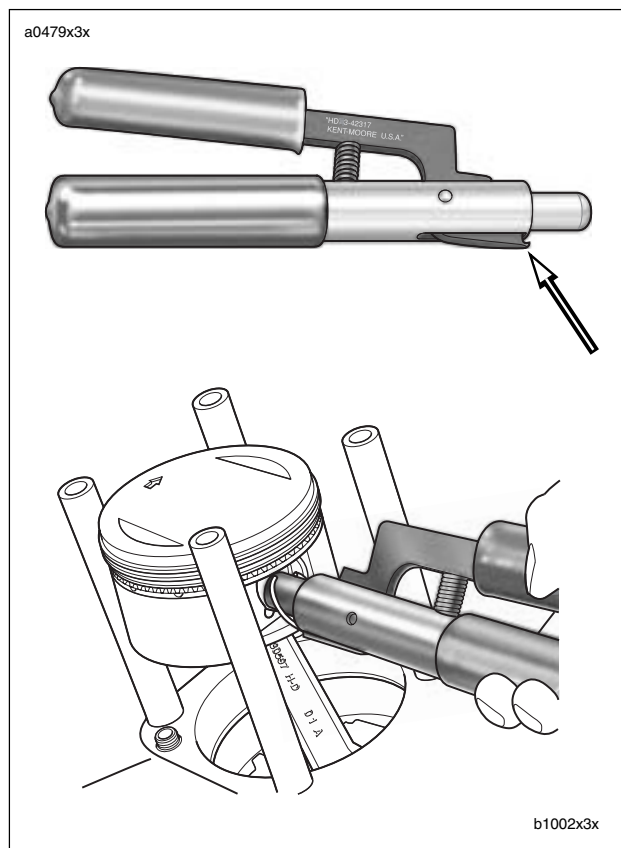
Removing Piston Pin Circlip Using Piston Pin Circlip Remover/Installer (Part No. HD-42317)
